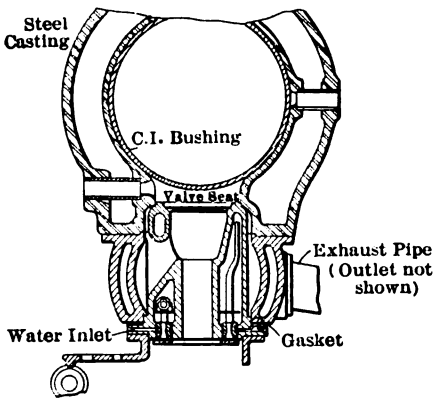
CROSS-SECTION OF CYLINDER THROUGH IGNITER HOLES
